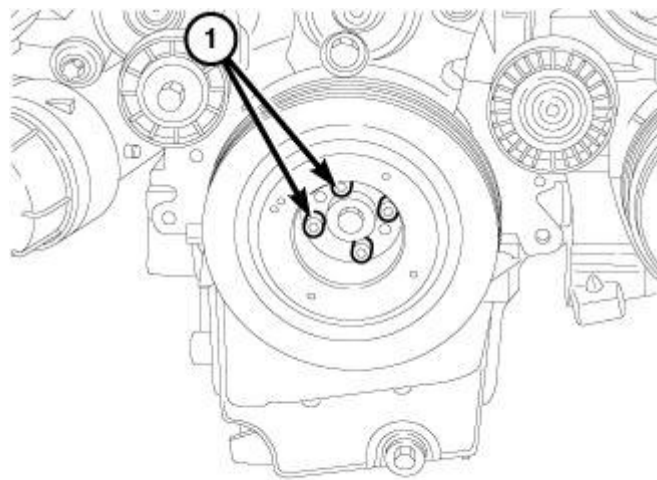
Front Crankshaft Vibration Dampener Pulley Bolts
